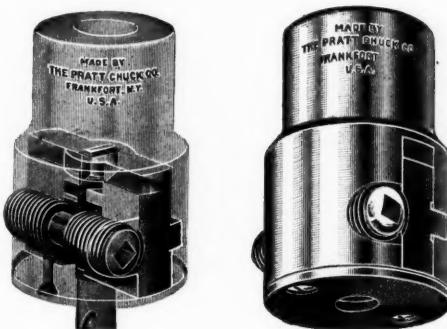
is a general view and Fig. 2 a clear representation of the working parts of a chuck designed to meet such conditions. The distinctive feature of the tool is an equalizing driver which takes the flattened shank-end of the drill or other working tool. This driver consists of a cross-bar pierced with a rectangular socket-hole, indicated in both figures, lying in the base of the chuck. By the use of this device the jaws of the chuck have only to hold the work tool in perfect alignment, and are relieved of the twisting strain of driving the tool as well. The end of the tool-shank need not be accurately or centrally flattened as the body of the chuck is hollowed out to a sufficiently loose fit about the driver to allow any such an imperfect shank to find the socket and be positively driven by it. As it is impossible for a tool to slip, the jaws need be tightened only enough to allow the tool to float—a handy feature when the chuck is in use on worn lathes where the turret holes are out of line. Perfect work on a finishing cut, it will be readily appreciated, can thus be done on an old and imperfect machine. The use of the positive driver here described is facilitated by the fact that leading drill makers furnish drills and reamers with properly flattened shank-ends, if desired, without extra expense over ordinary round shanks. Taper shank drills with flattened ends are perfectly held by the driver, the jaws bearing for alignment grip on a special taper steel split sleeve made for these chucks. The chucks are made in five sizes, adapted for cranks from the smallest up to 2 inches in diameter, by the Pratt Chuck Co., Frankfort, N. Y.
